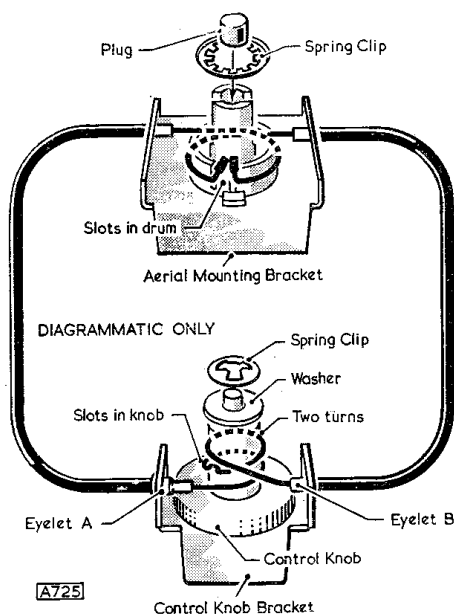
The cable control assembly for the ferrite-rod aerial.
